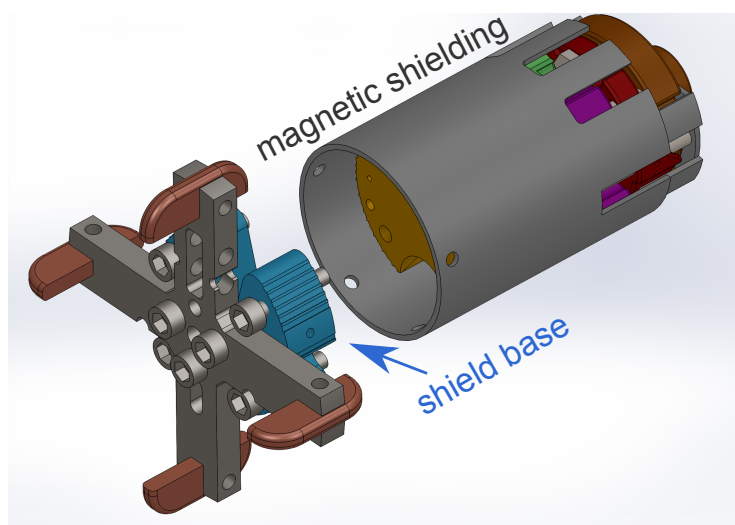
Third assembly step of the OAG. The magnetic shielding is made of permalloy.
